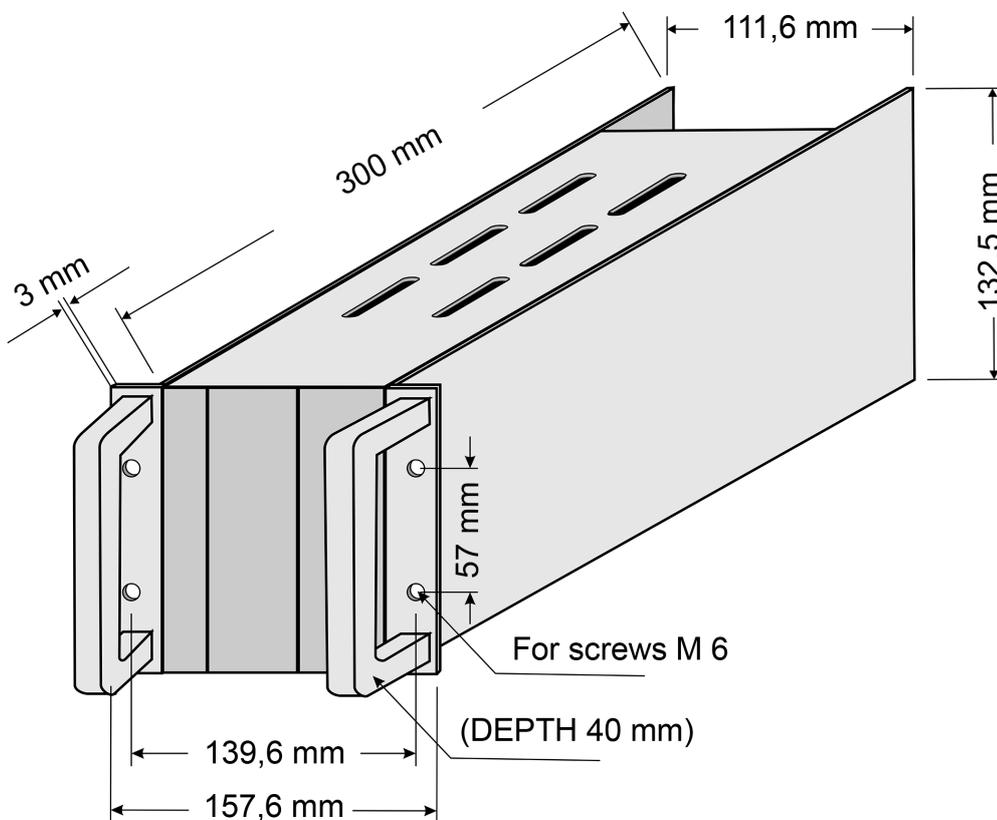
Rack for 2 modules (Panel cut out 124 x 133 mm)
